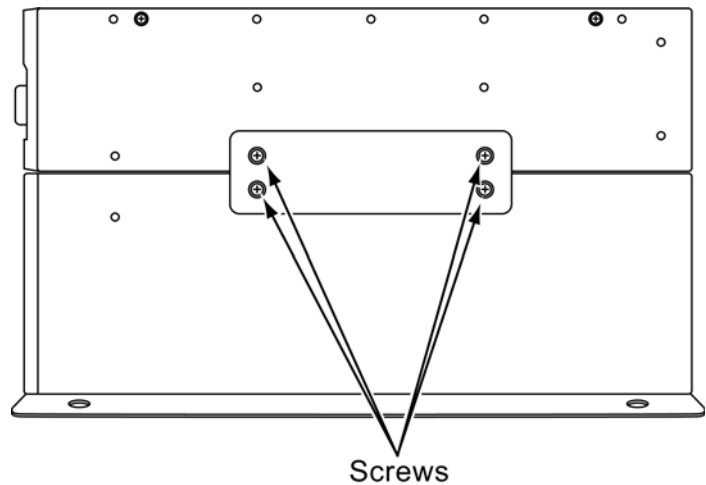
Install CHS2U JOINT BRACKET KIT
